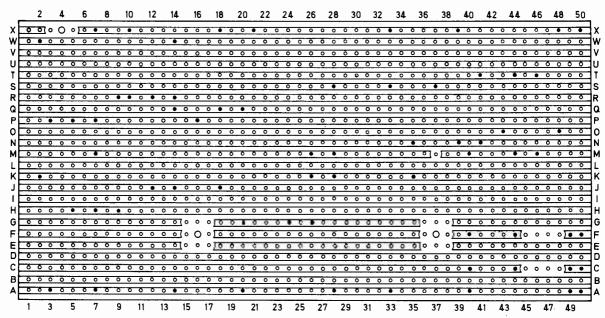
The copper strips should be cut away as shown above before components are mounted on the lower circuit board.
